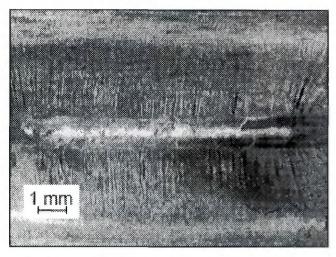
Surface of a bead-on-plate weld showing disruption of the oxide layer on the weld center.
